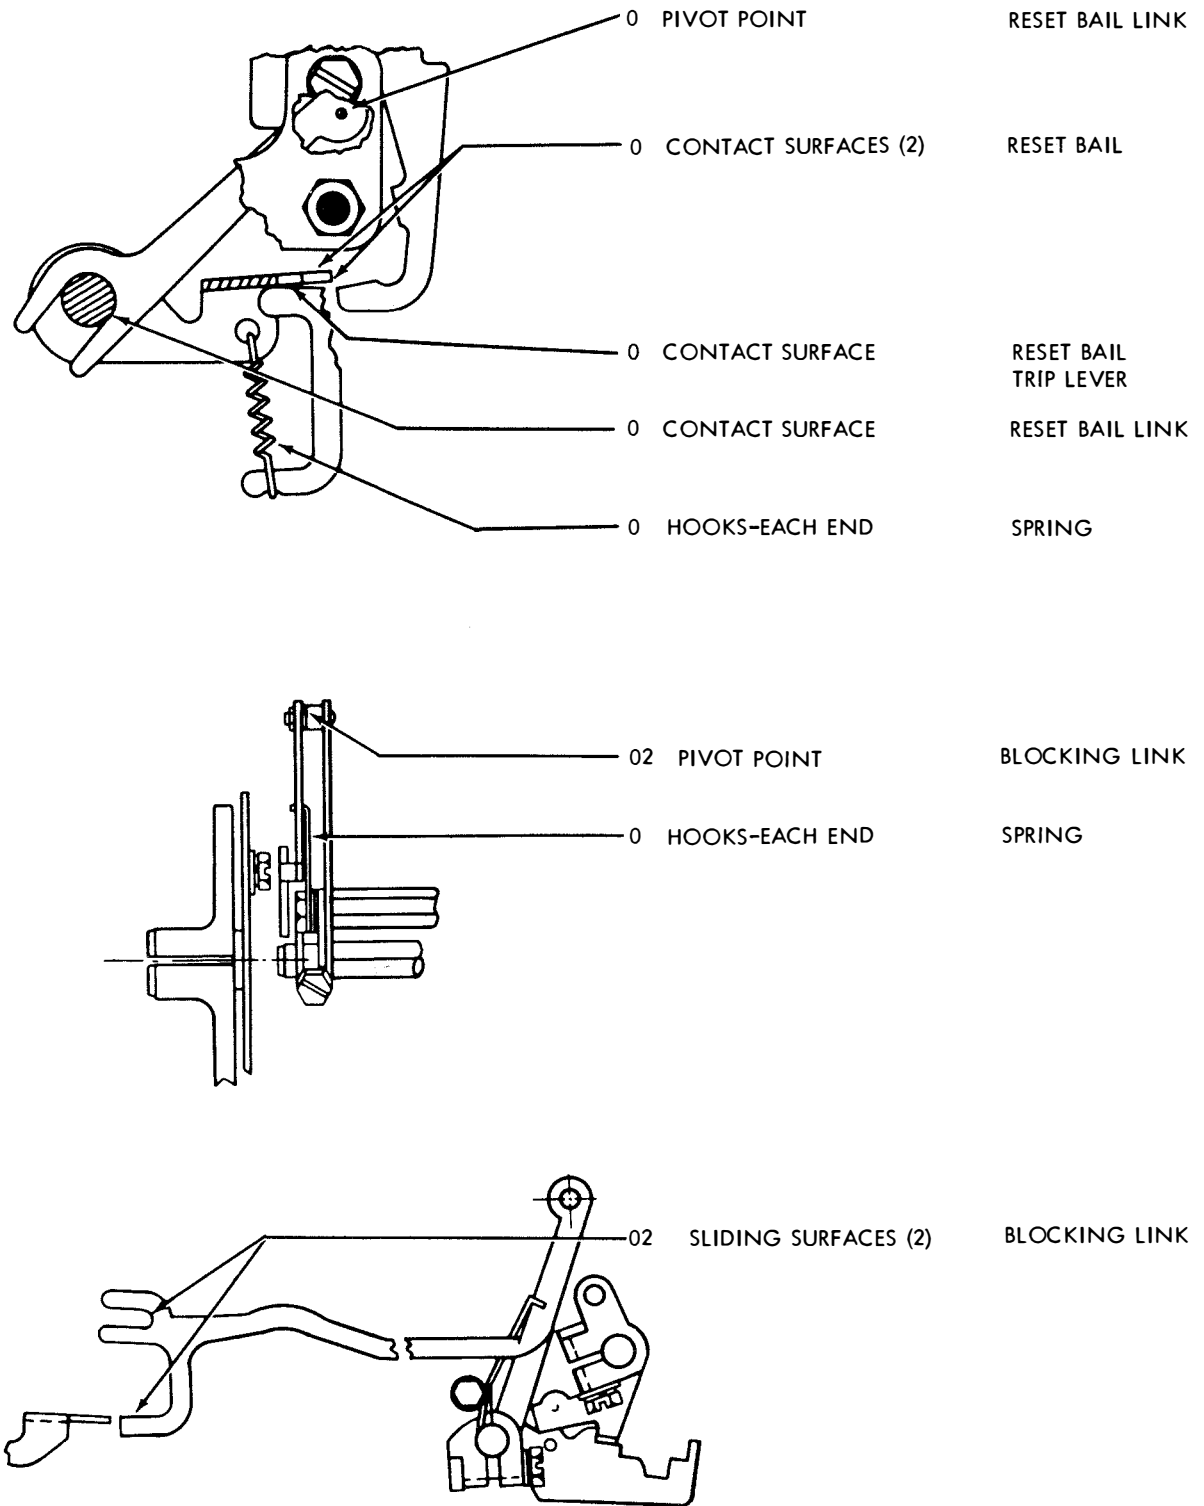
Blank Tape Feed-Out Mechanism Lubrication (Not Applicable to TT-192A/UG and TT-253A/UG)
